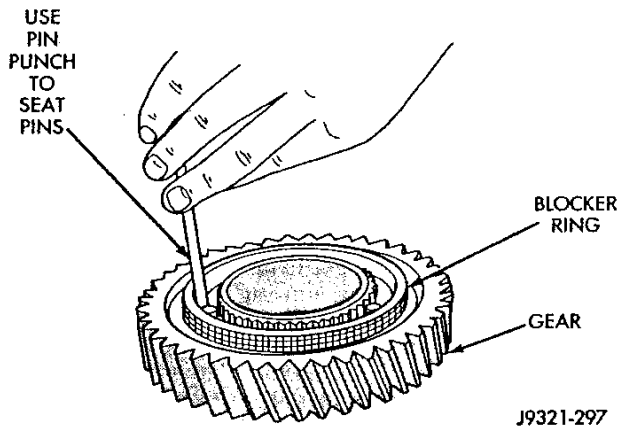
Seating Roll Pins In First/Second Gear Blocker Rings
